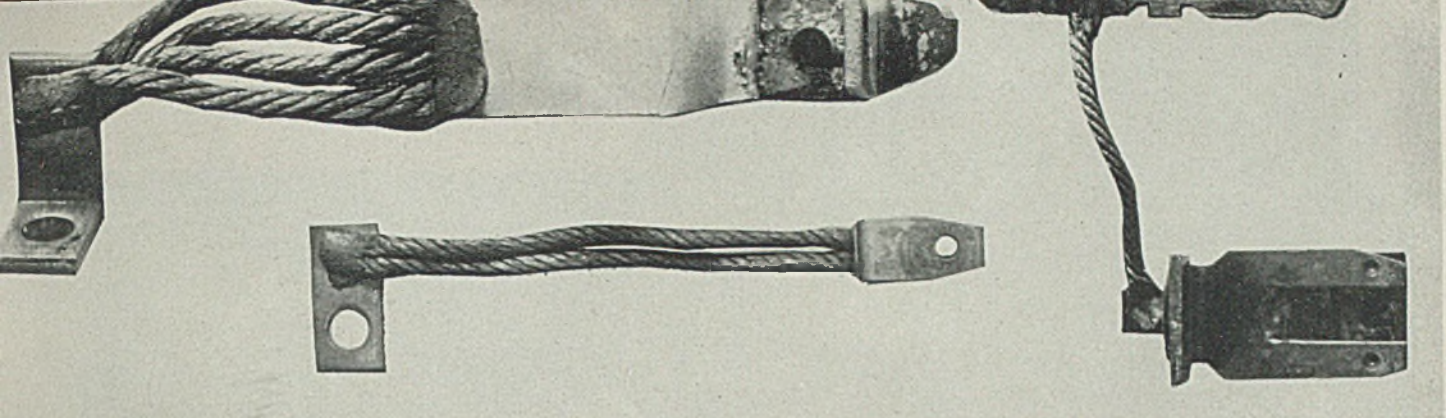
Neat appearing, completed welds have exceptionally strong unions. Here a 1176-strand cable of 0.002-inch wires was welded to Riverside bronze and to bimetal in the center assembly, while a total of 3640 strands of 0.003-inch wire were welded to tinned copper lugs in the large assembly at top. Bottom pieces are welded to 2352 strands of 0.002-inch wire
